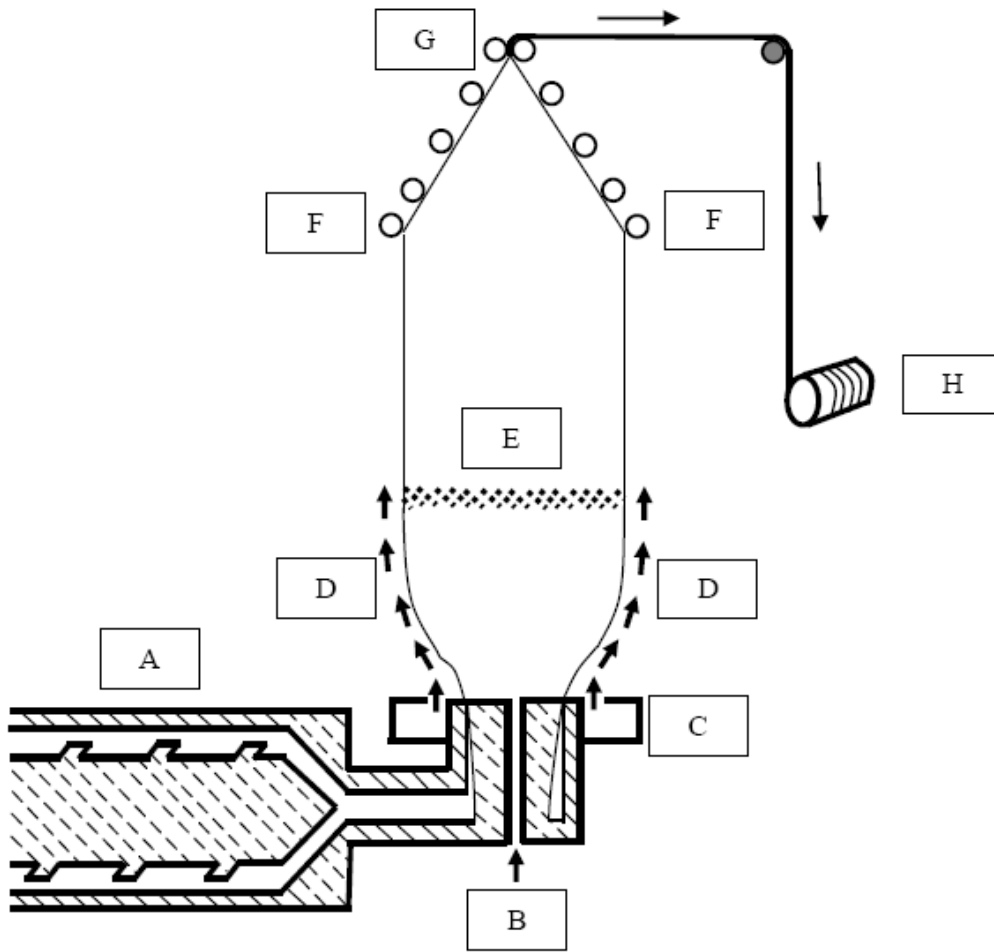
Schematic diagram of a blown film: A extruder; B air supply; C air ring; D cooling air flow; E freezing line; F guide rolls; G driven nip rolls; and H winder.<sup>75</sup>
